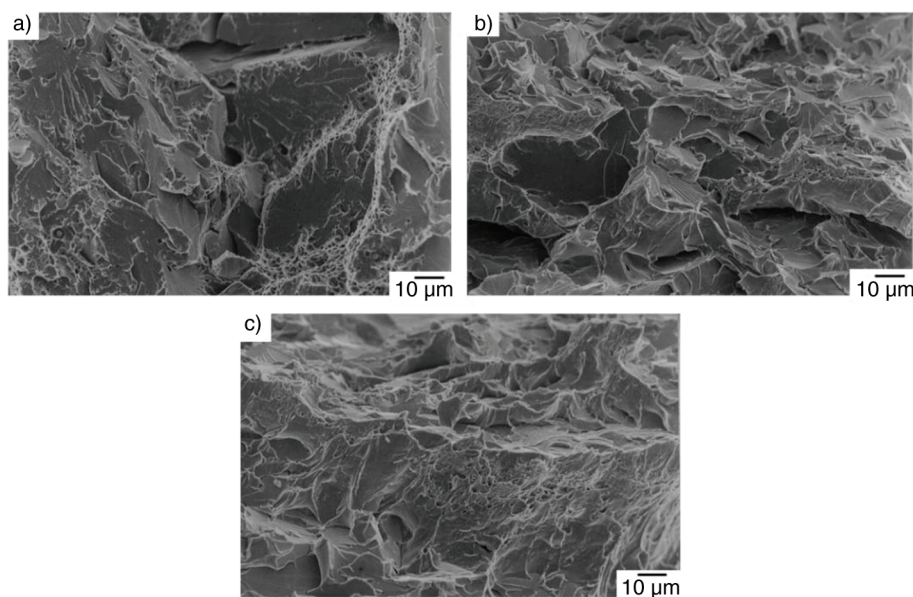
Fractography of impact fractured specimens for the welded joint naturally over-aged: (a) weld bead, (b) HAZ and (c) base metal, with different amount of cleavage brittle fracture.
